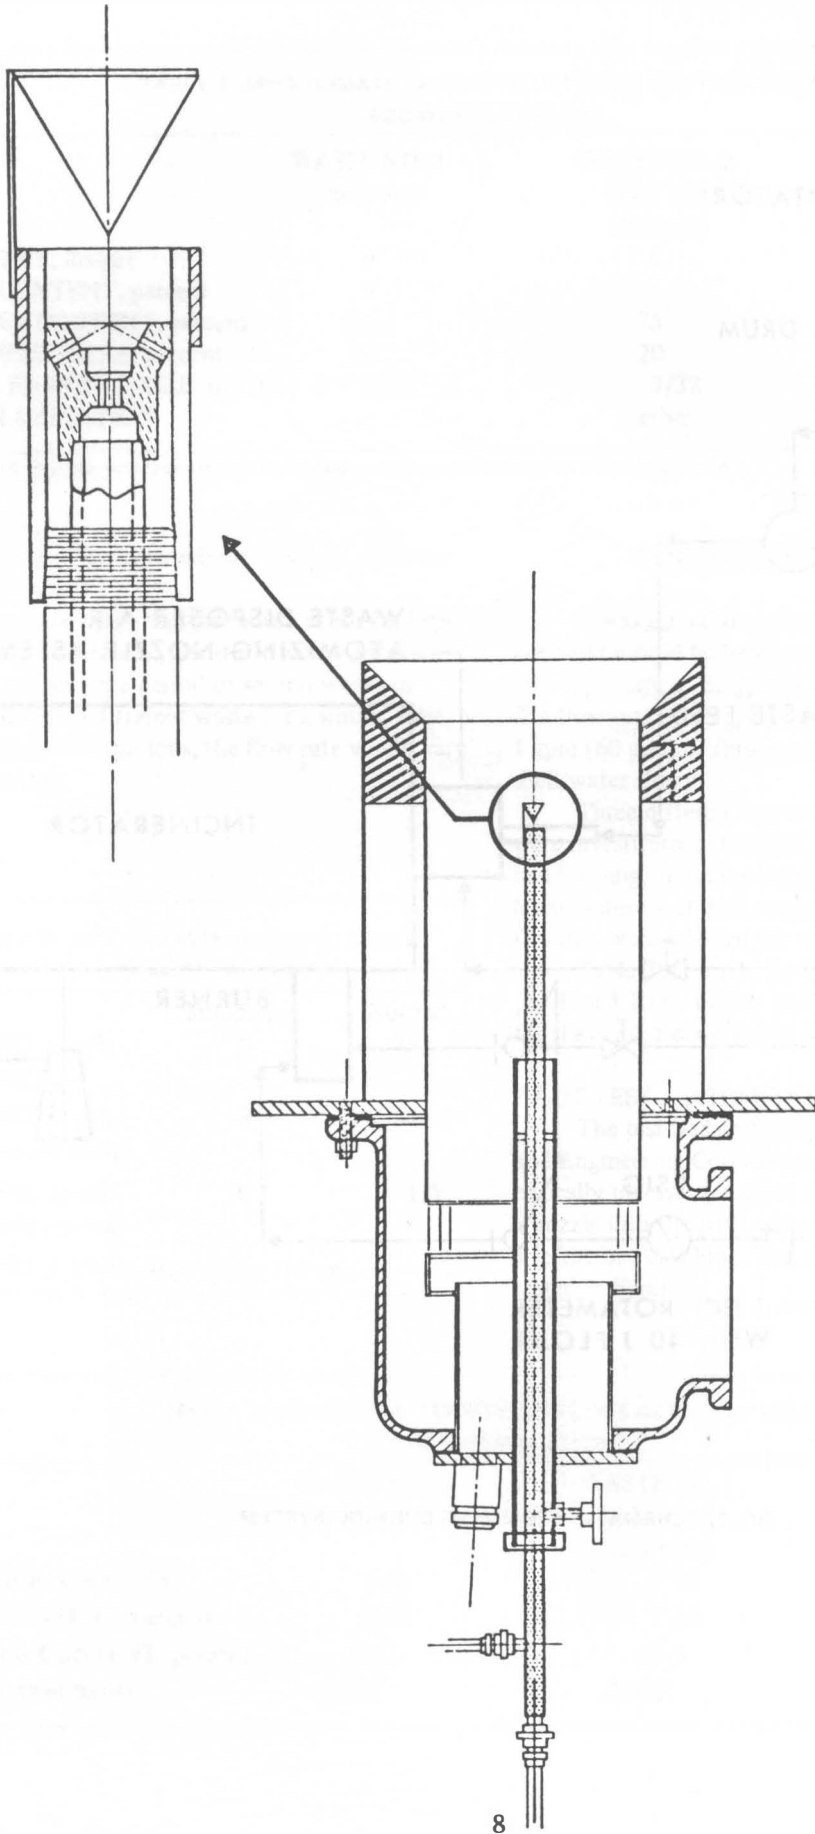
PILOT TEST - ATOMIZATION BURNER NOZZLE ASSEMBLY
